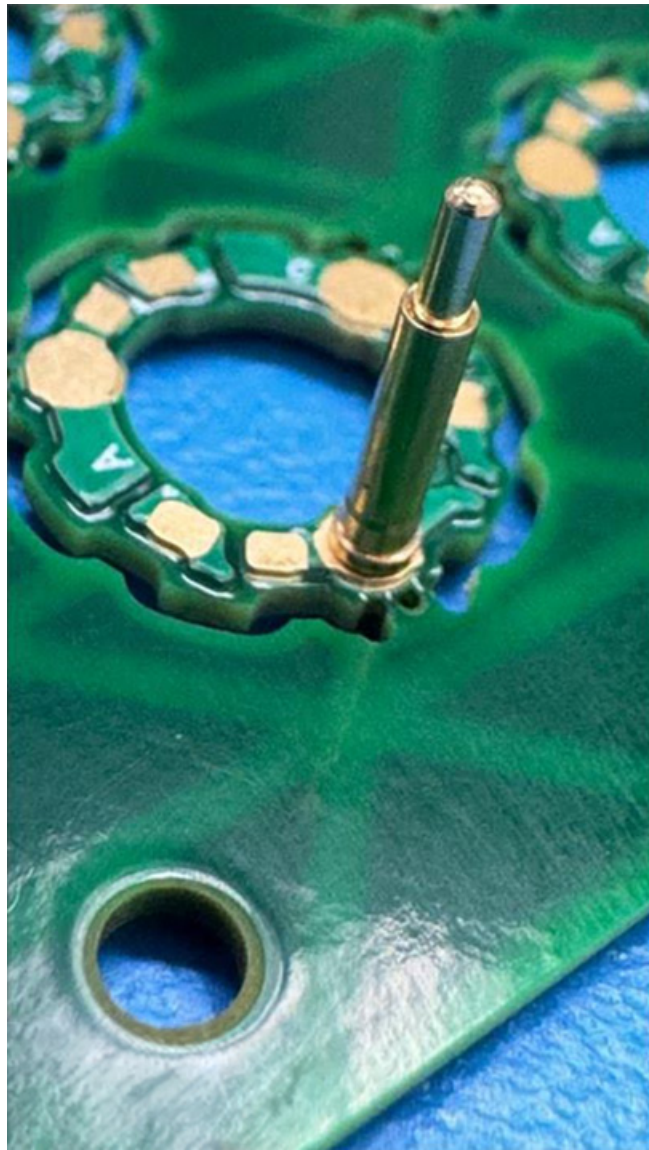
Reducing the stencil aperture to 50% of the pad area limited solder volume and maintained proper pogo pin perpendicularity after reflow without the need for a holding fixture.
